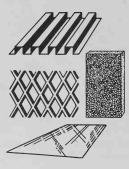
Texture can be added by hammering, perforating, cutting, or forming the metal.
